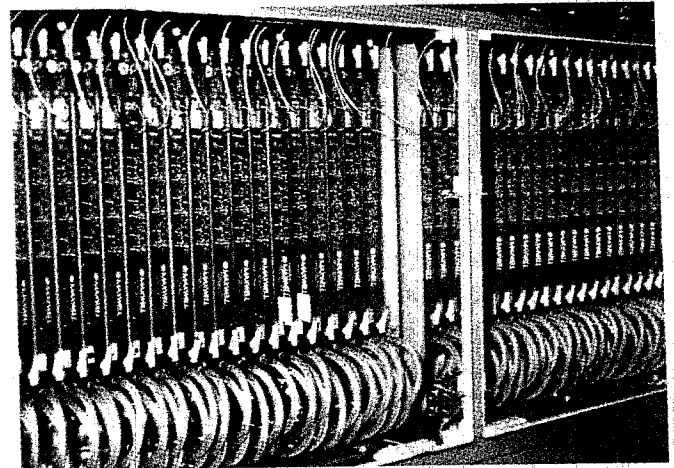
View of the Series FET switch card cage assembly with cards in place.
